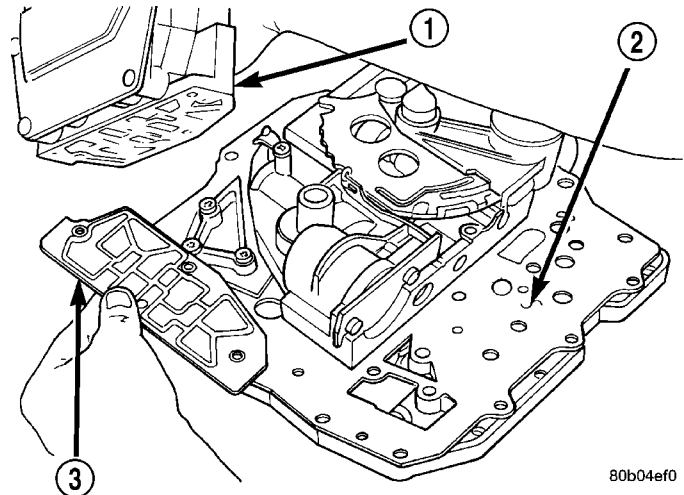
Solenoid/Pressure Switch Assembly and Screen
